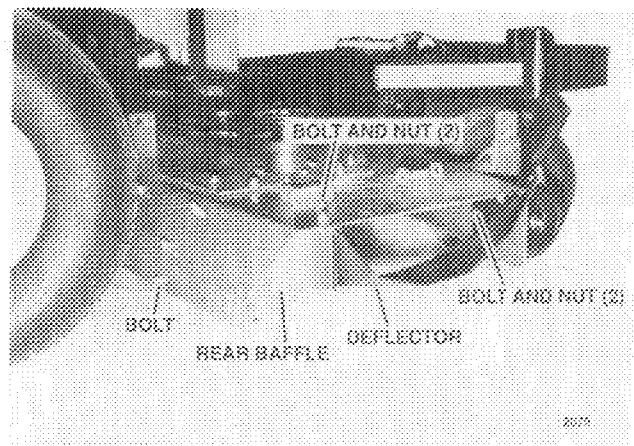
Install Deflector and Rear Baffle - 60" Mower
